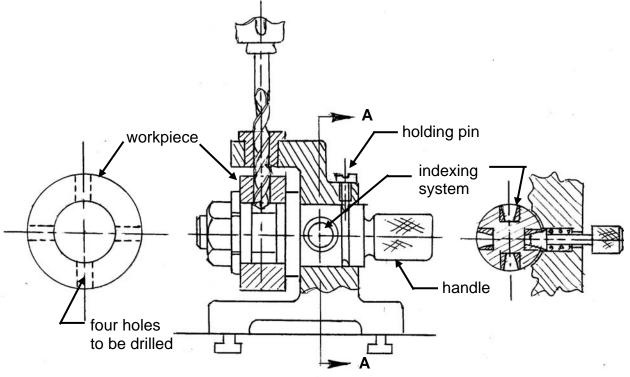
Jig for drilling four equispaced through radial holes in a ring.
